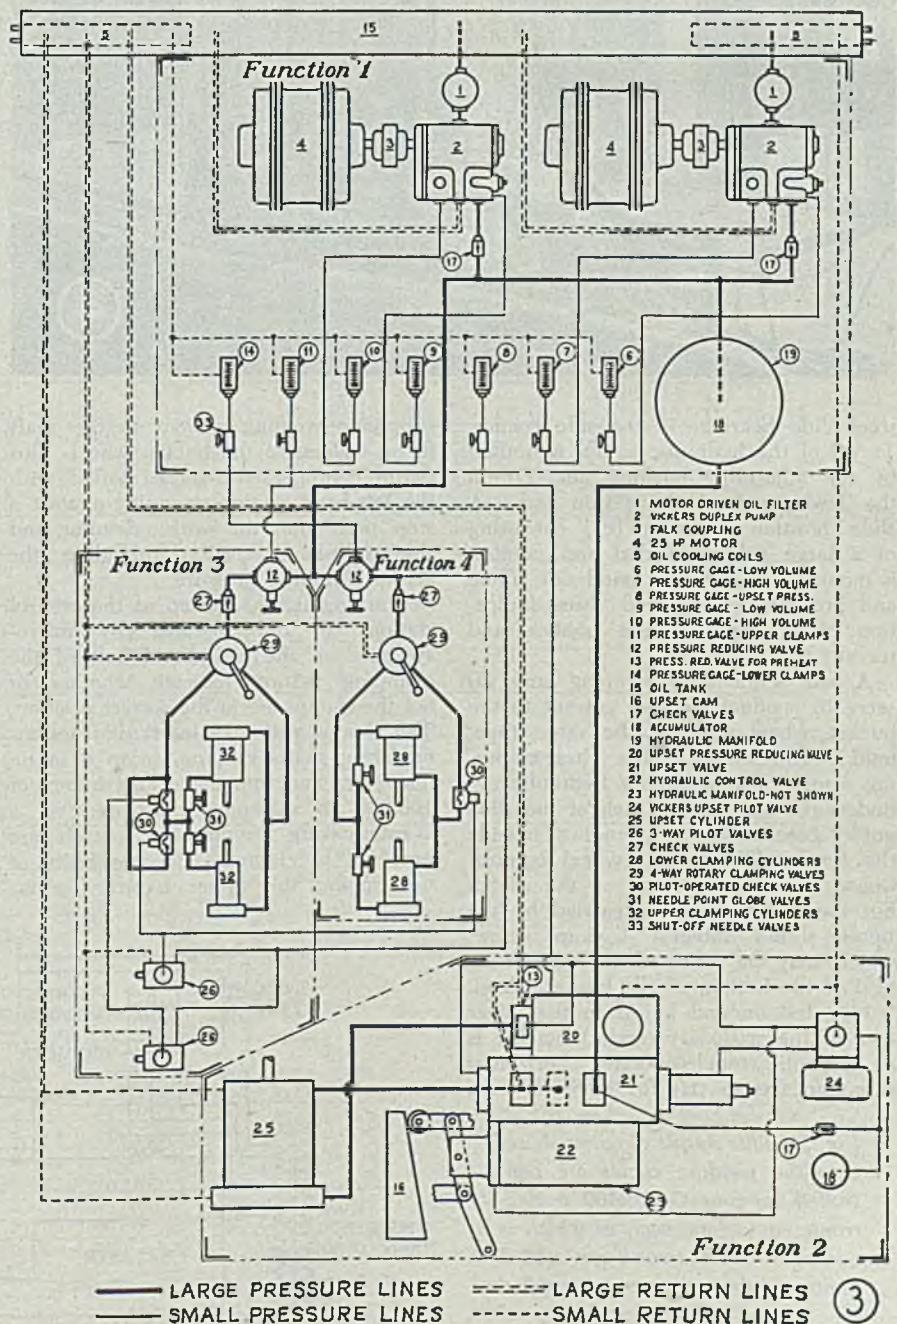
Schematic diagram of the hydraulic system shows (1) the pair of duplex pumps, (2) upset cylinder mechanism, (3) upper clamping cylinders and (4) lower clamping cylinders
